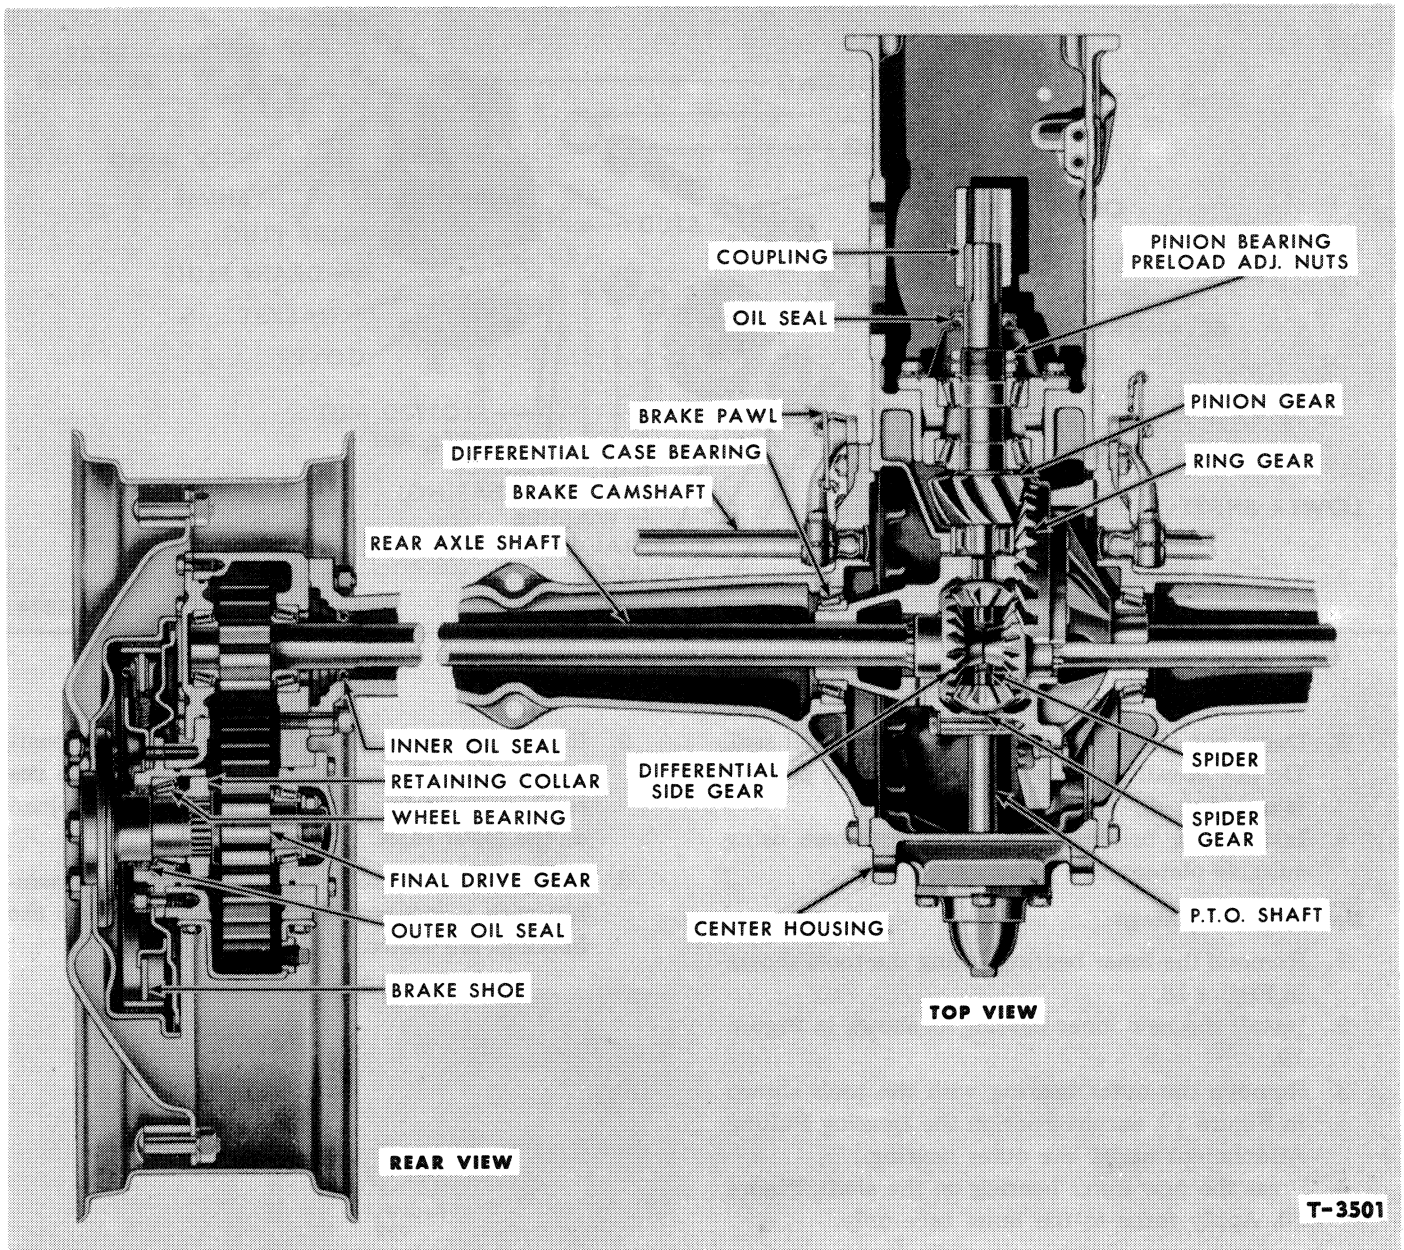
Sectional View of Row Crop Rear Axle and Final Drive
